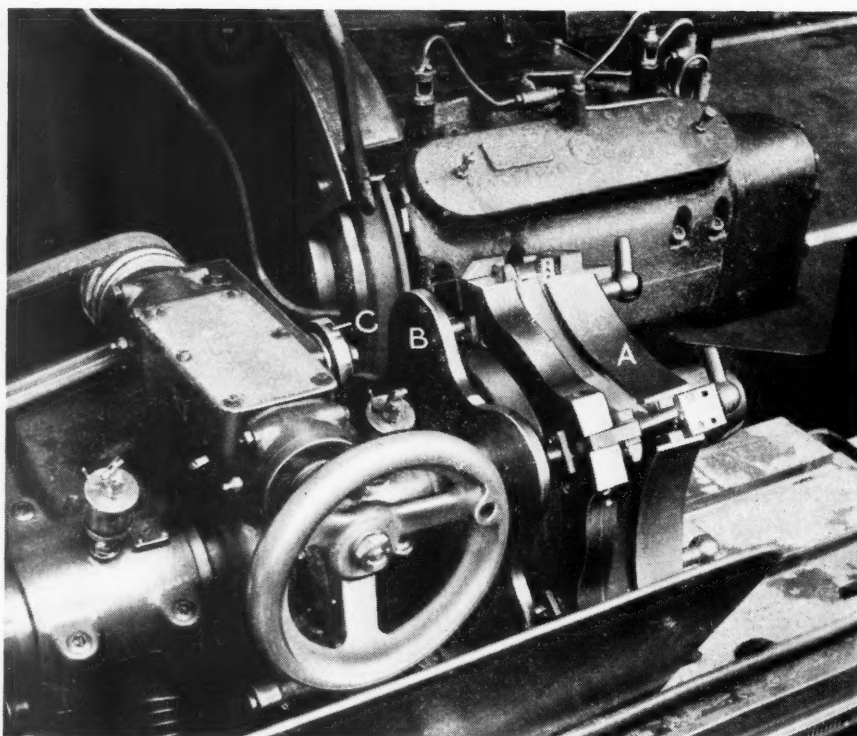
Cam-controlled work-holding fixture employed on a grinder to complete the external profile of the turbine blade at the root end
